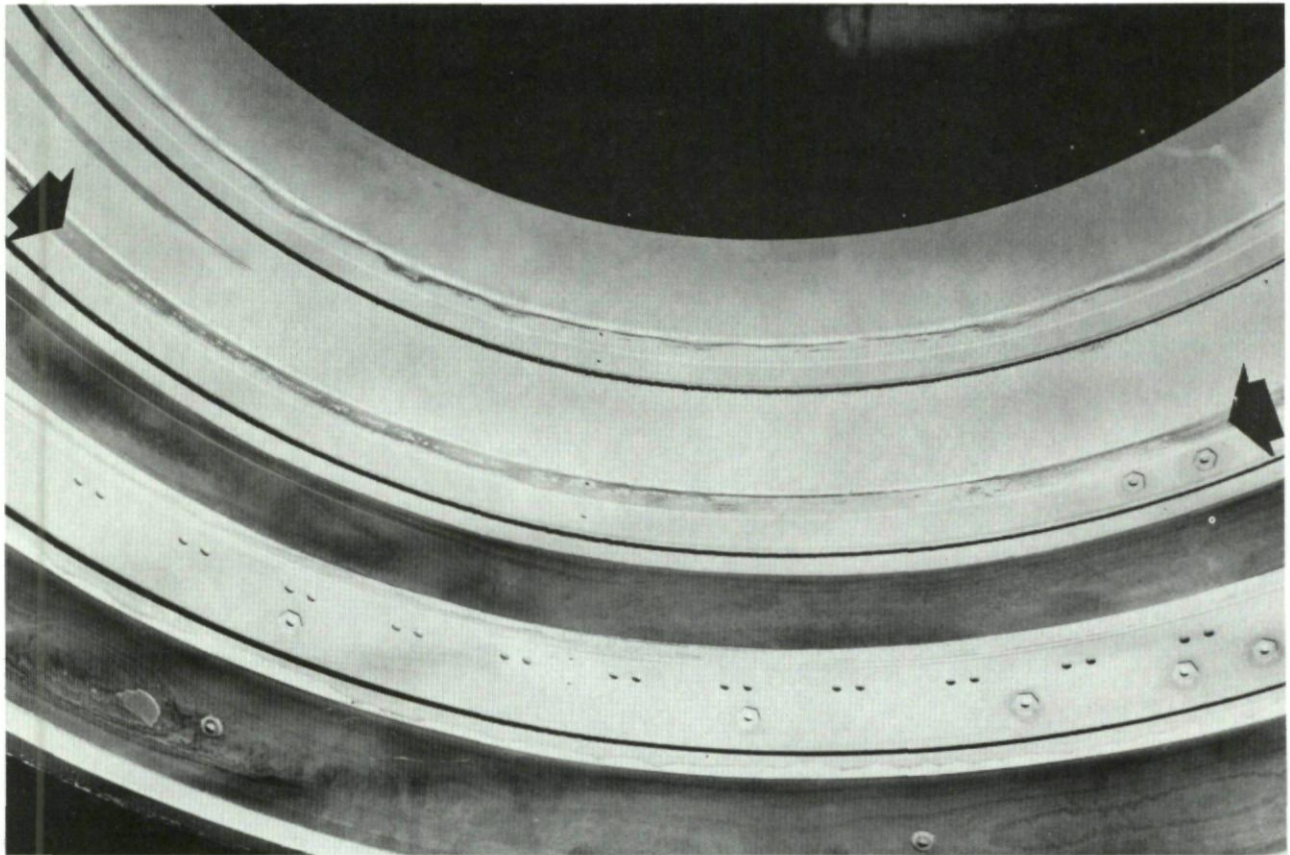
Fretting corrosion in a magnesium alloy (EZ-33) compressor casing, indicated by arrows
